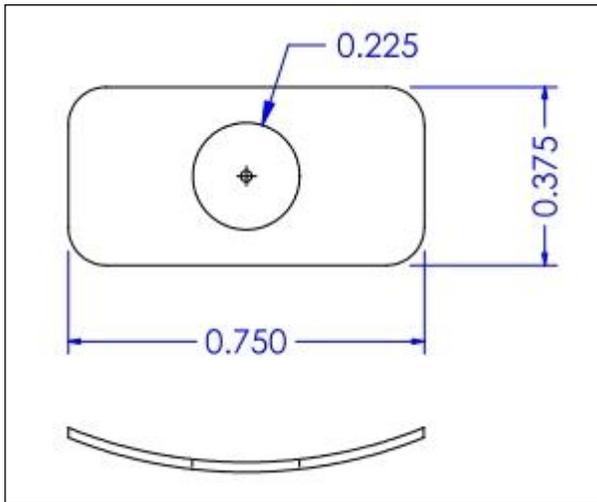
Construction drawing of the canon spring. The spring is made from .015" sheet brass.
